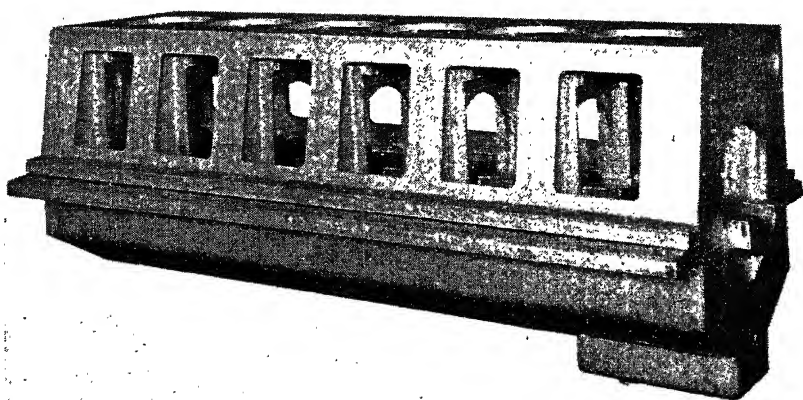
Welded Diesel engine crankcase assembly. (Courtesy of Lukenweld, Inc.)
